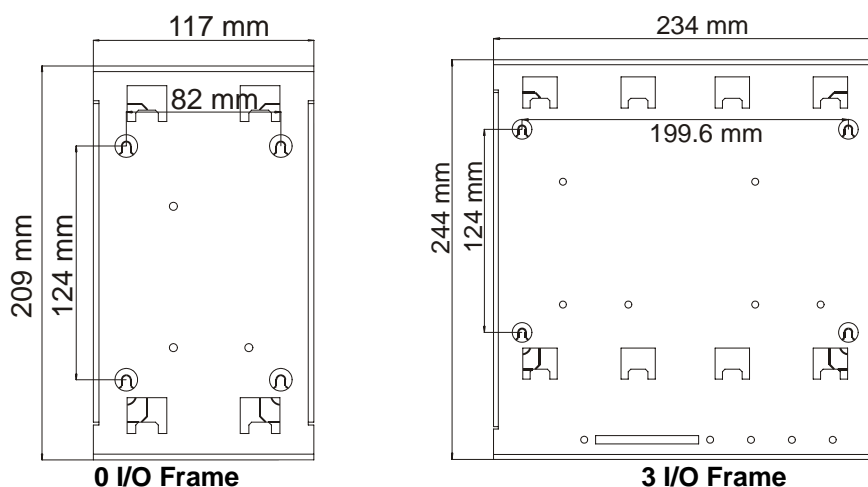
No I/O and 3 I/O Frame Installation Dimensions and Screw Holes for Installation
